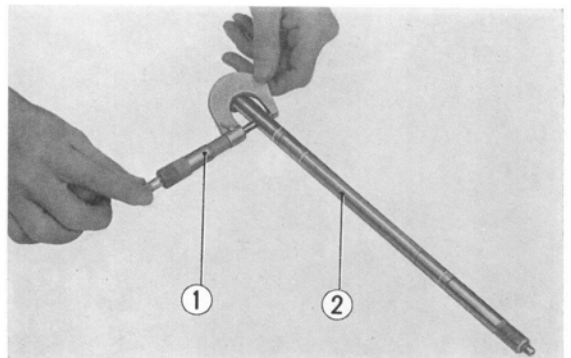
① Micrometer ② Rear fork pivot shaft
